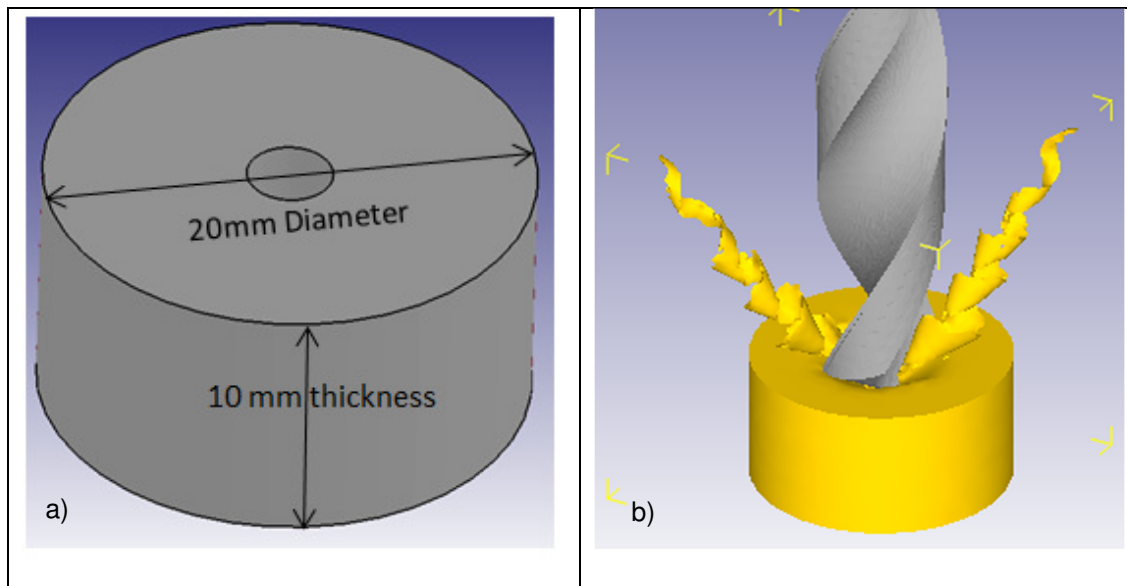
Workpiece a) showing the pre-cored pilot hole and b) while being drilled in FEM (showing chip generation).
